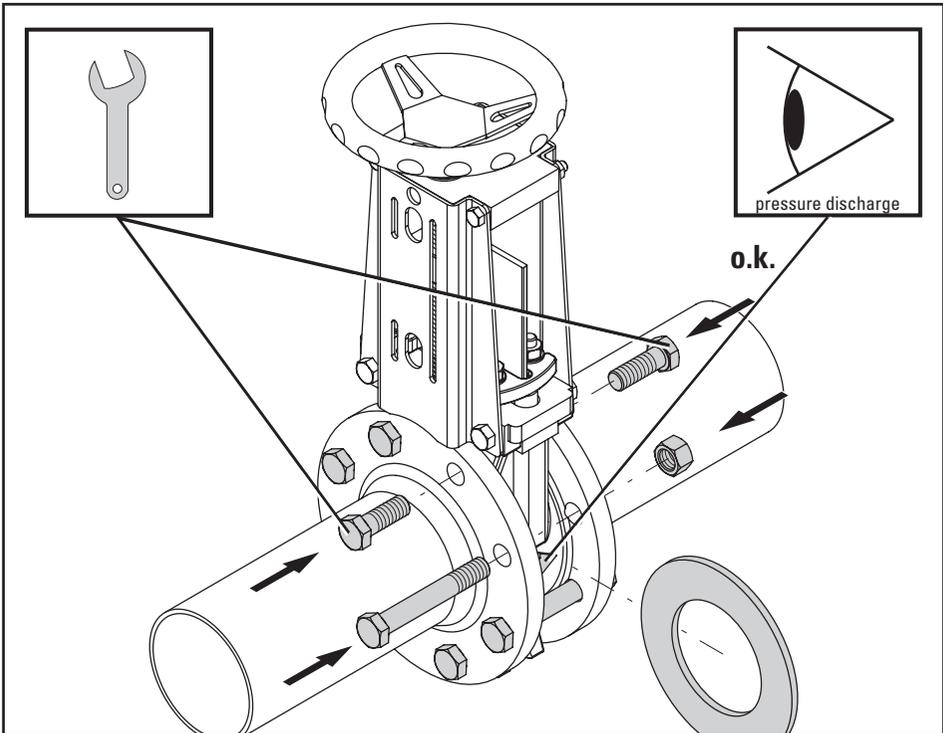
knife-gate-valve, mounting between two flanges
